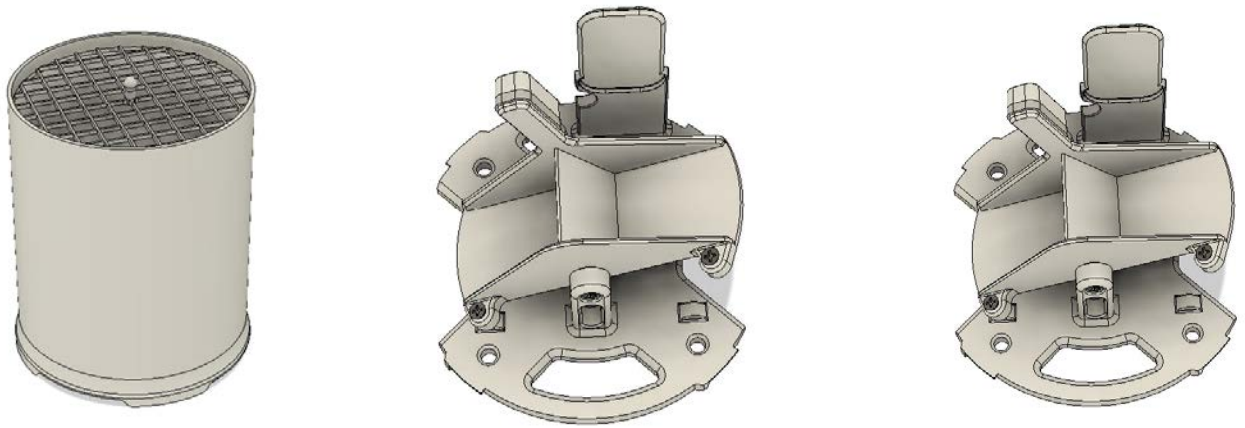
3D CAD Assembly of the Tipping Bucket Housing and Internal Magnet-Lever Mechanism for Rainfall Measurement.
